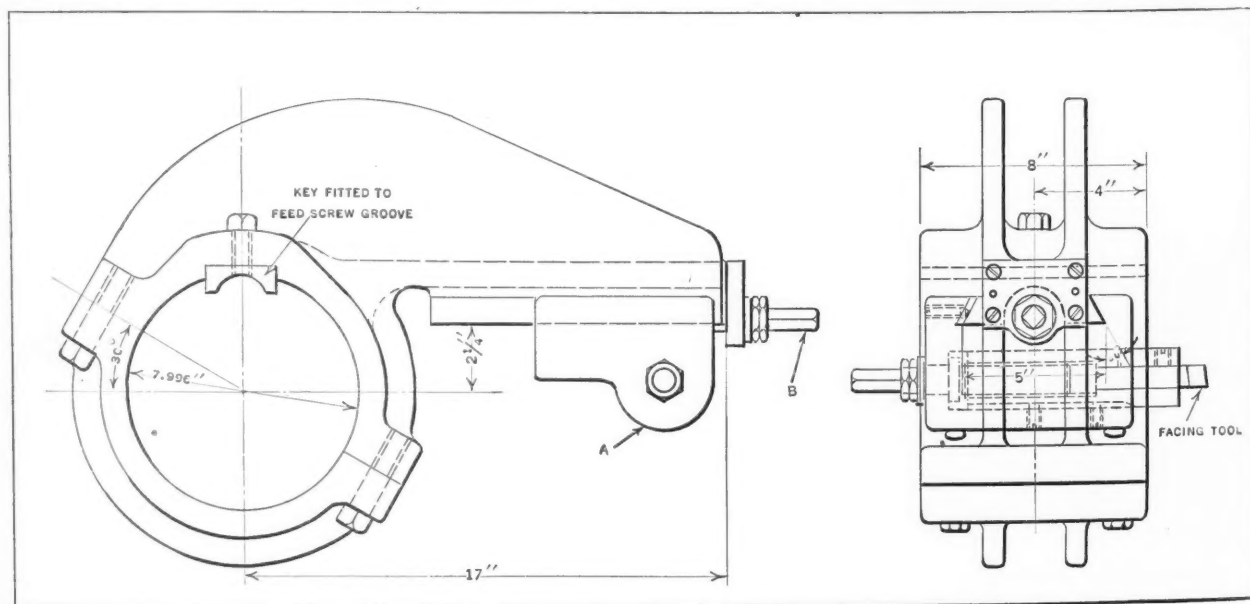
Facing Head Shown Mounted on Lower Boring-bar in Heading Illustration
